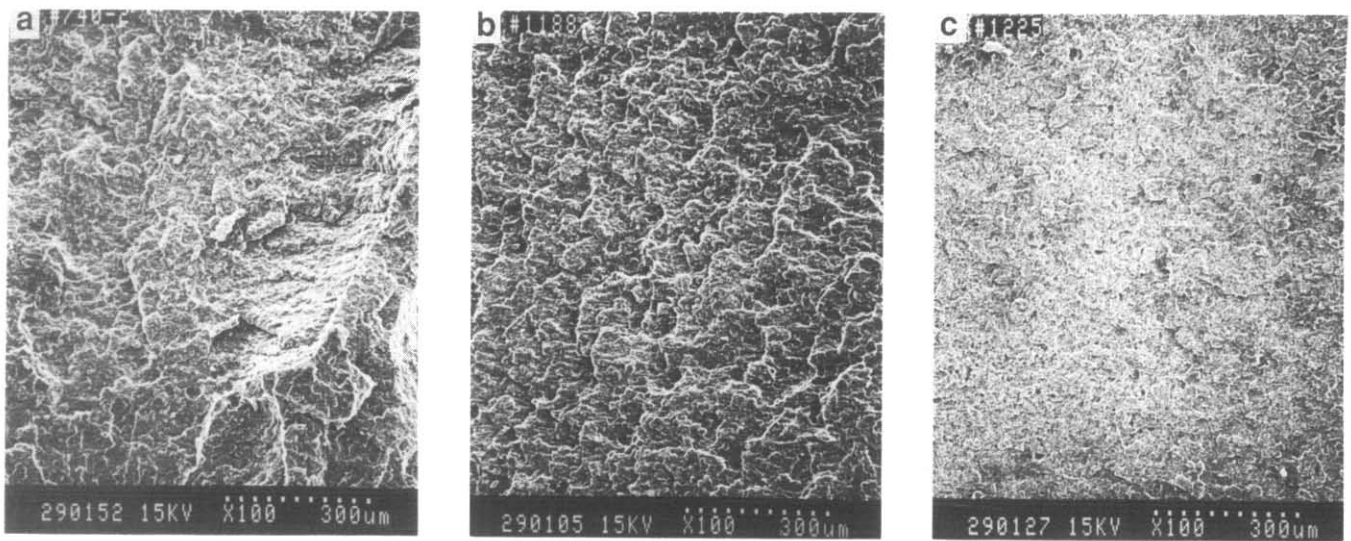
SEM micrographs (original magnification 100 \times) of the fracture surfaces of three 30-PF-PBT specimens: (a) unwelded specimen; (b) specimen welded at 120 Hz at a weld pressure of 3.45 MPa; (c) specimen welded at 250 Hz at a weld pressure of 0.9 MPa
